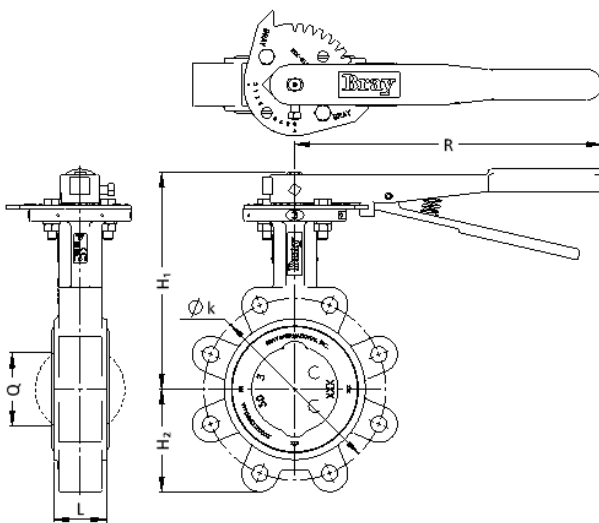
Example schematic: Butterfly Valve, lug-type with hand lever
